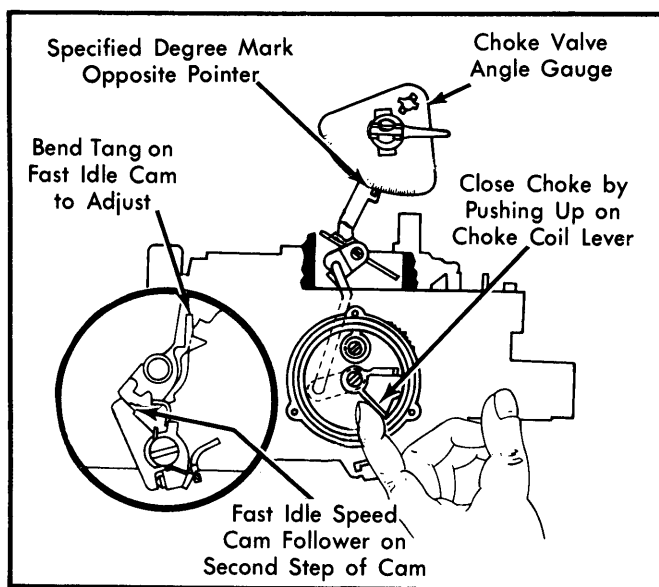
Adjusting Choke Rod (Fast Idle Cam)
